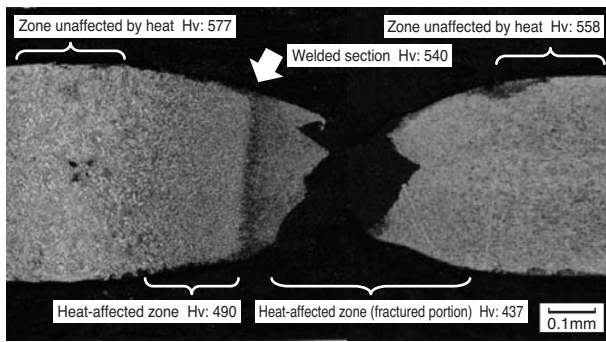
Metal structure and hardness of welded part fractured in tensile test
